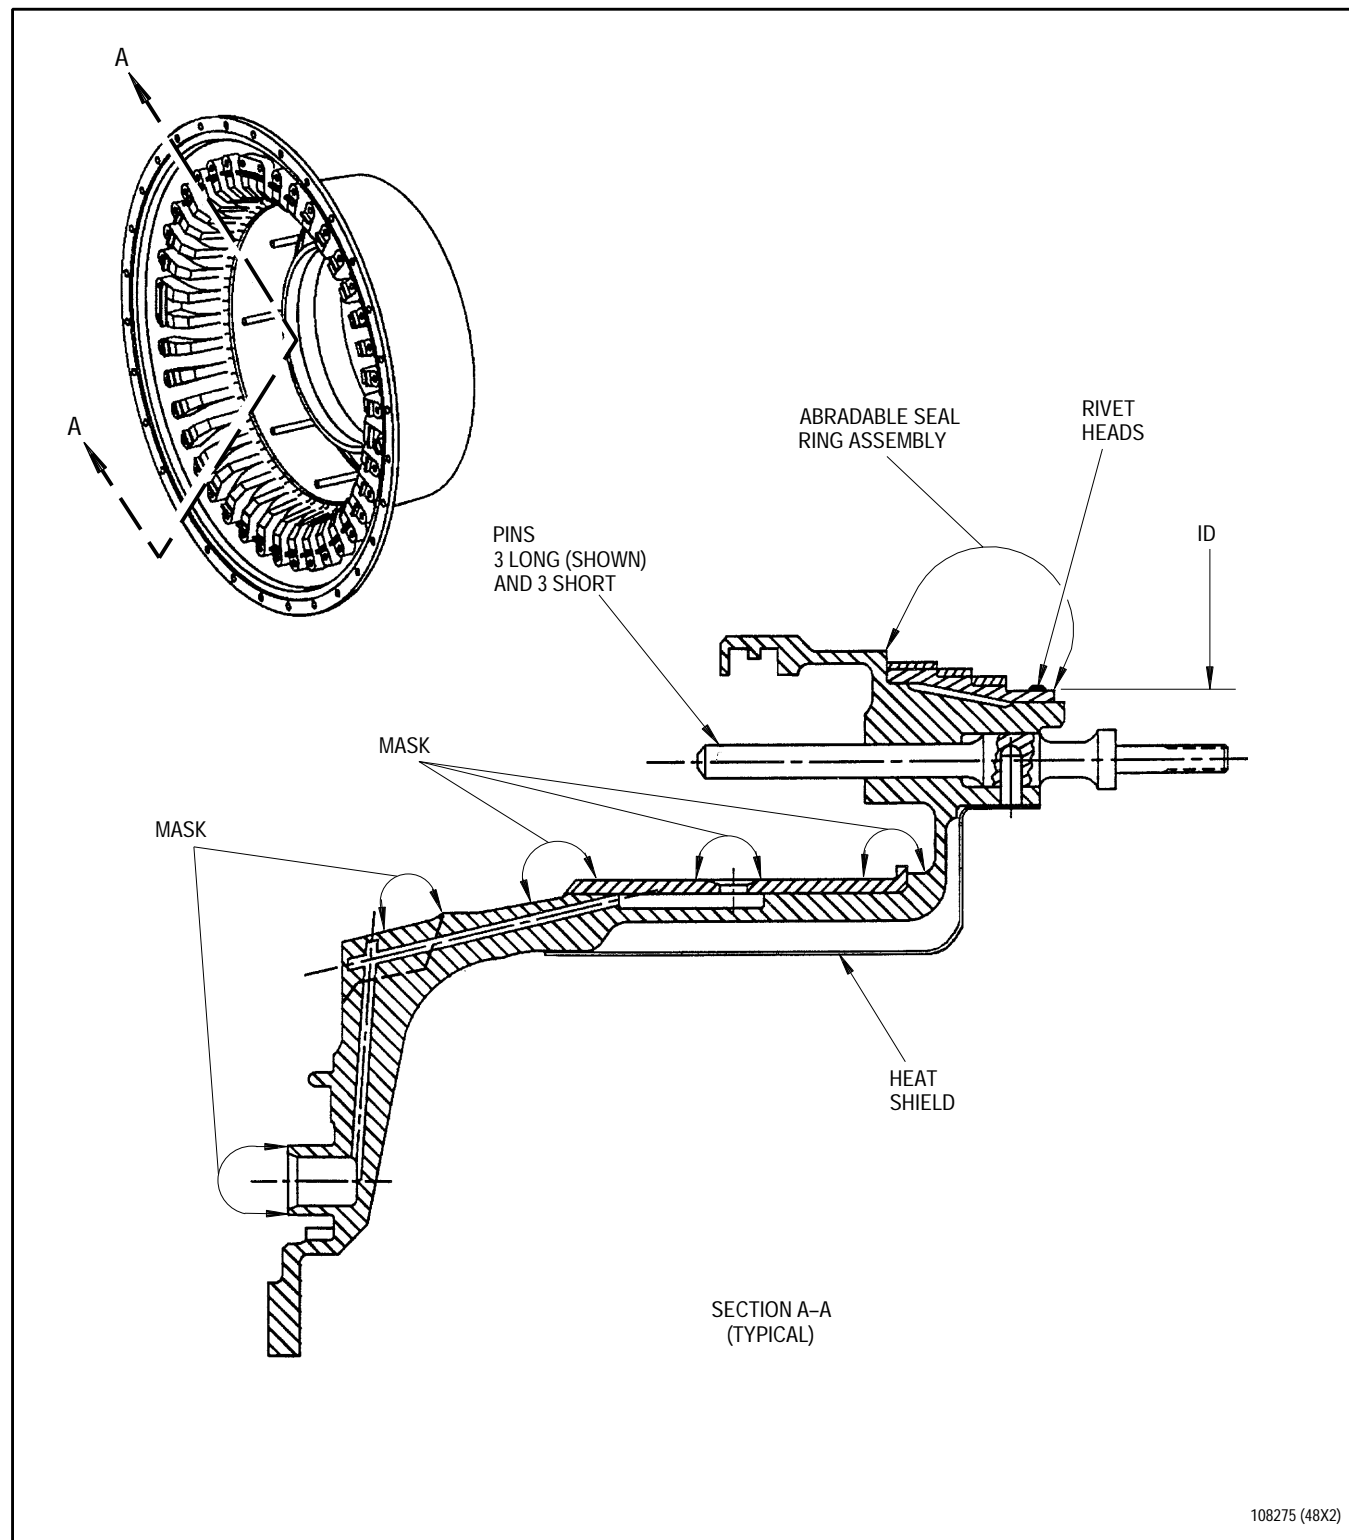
No. 3 Bearing Seal Support Assembly - Masking Application
